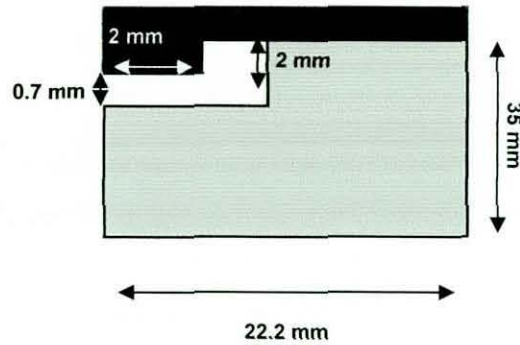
Side view detail of one sample holder block and grip plate.
